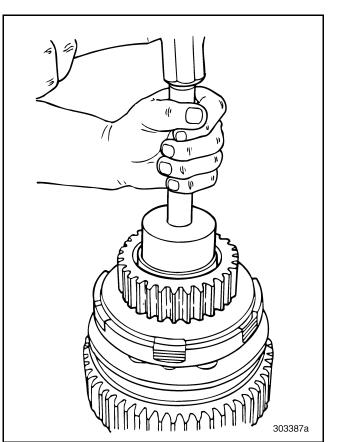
Installing Ball Bearing (T313L/T318L Shown)
